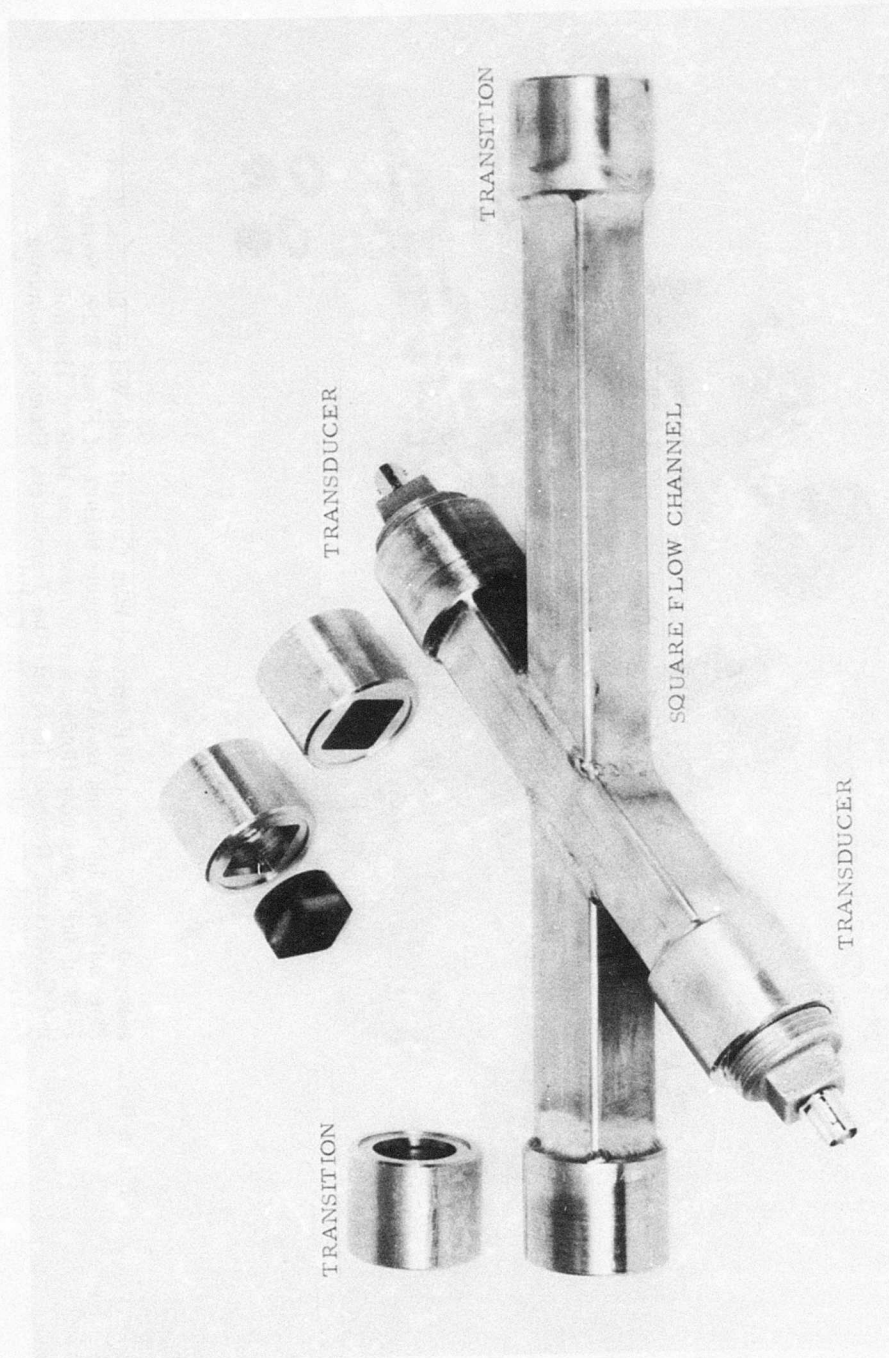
Welded Area-Averaging Flow Cell Fabricated of Square Stainless Steel Tubes and Standard Fittings.
